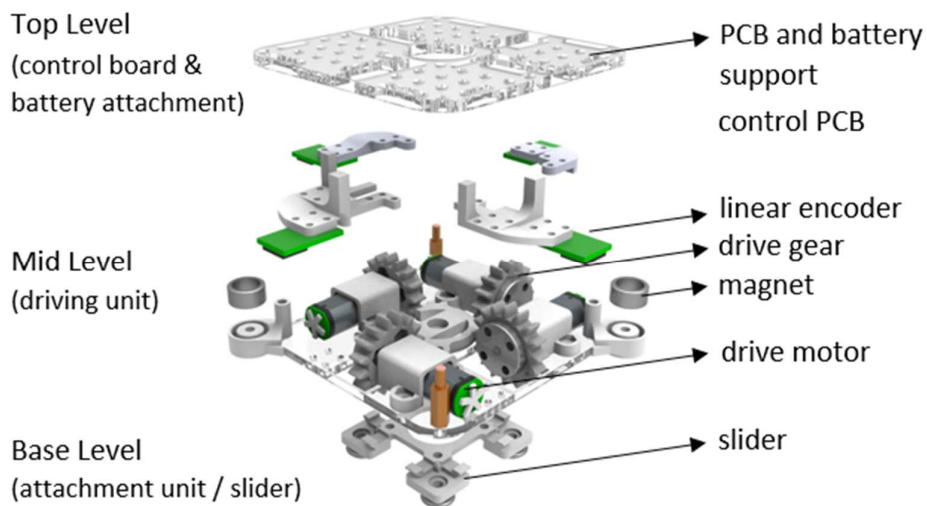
Exploded view of the first SCALA prototype agent, showing its components.
